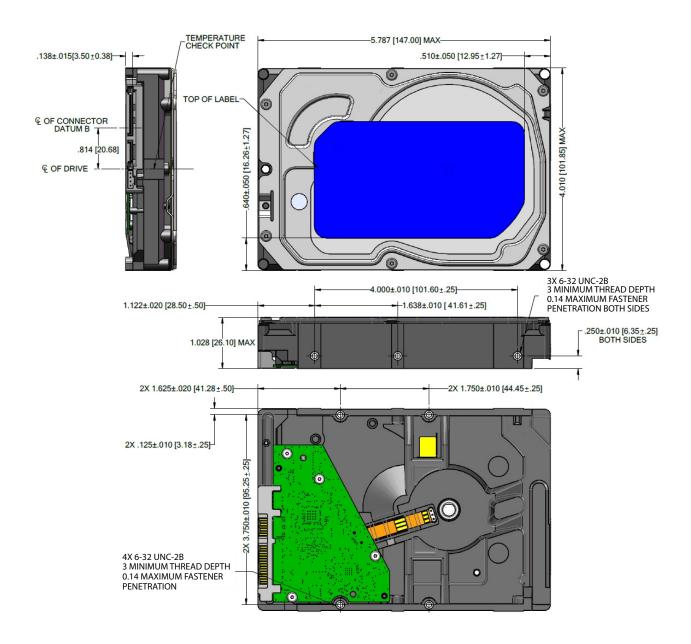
Mounting dimensions (ST8000VN002 & ST6000VN006 models)
